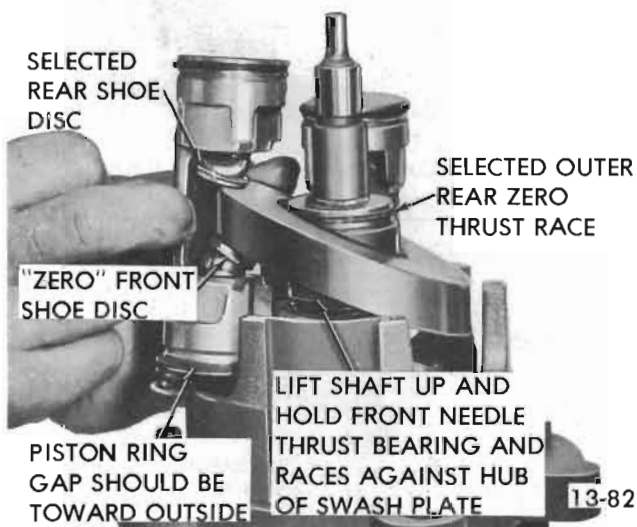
Installing Piston Assembly in Front Cylinder Half
